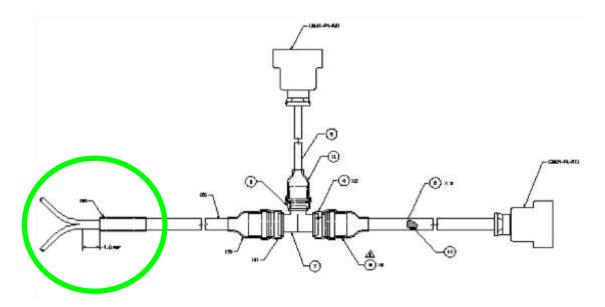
Typical Installation of Heat Shrinkable Boots on Conduit (no connector)
